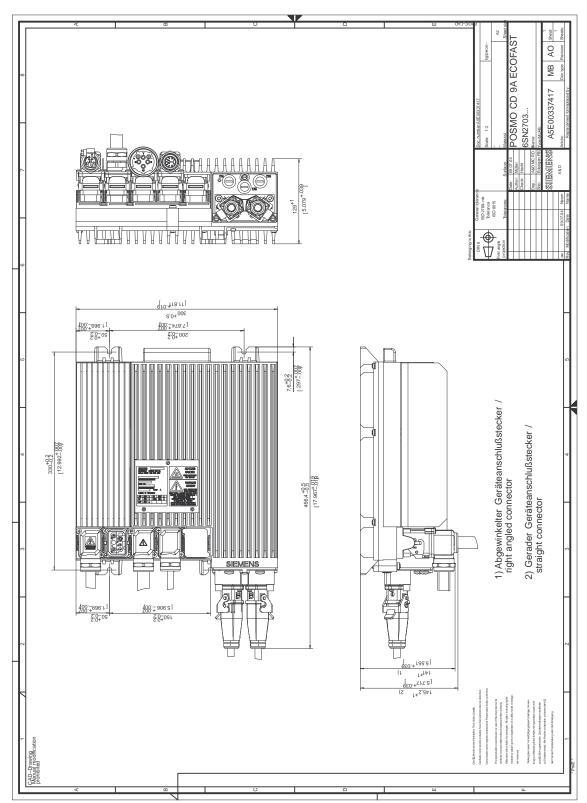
Dimension drawing POSMO CA 9 A, 6SN2 703-3AA1 -0BA1
